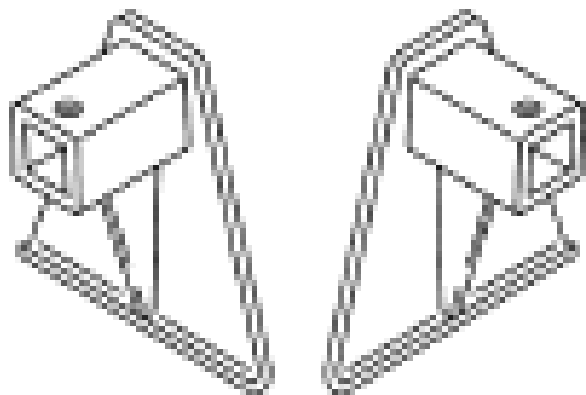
Identifying Crankshaft Rear Oil Seal Installer
